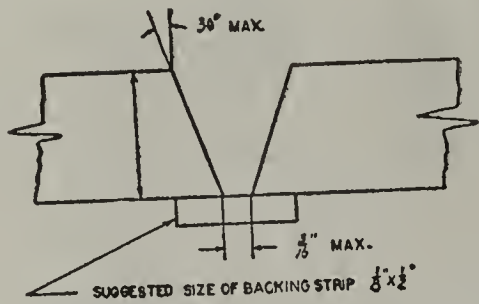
(a)—Butt Joint for Plate $\frac{3}{8}$ In. Thick
